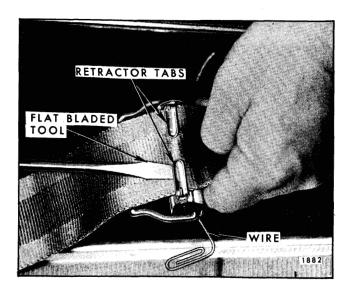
Removal of Bail Type Retractor from Seat Belt
